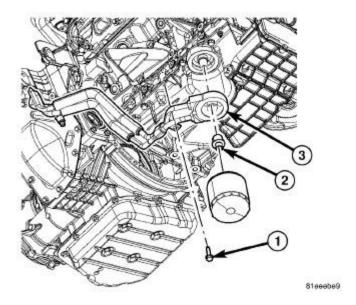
Cooler Line Retaining Bracket Fastener Courtesy of CHRYSLER LLC
